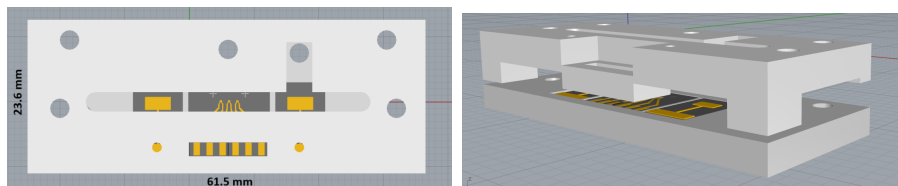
CAD top (61.5*23.6 mm) and perspective view
